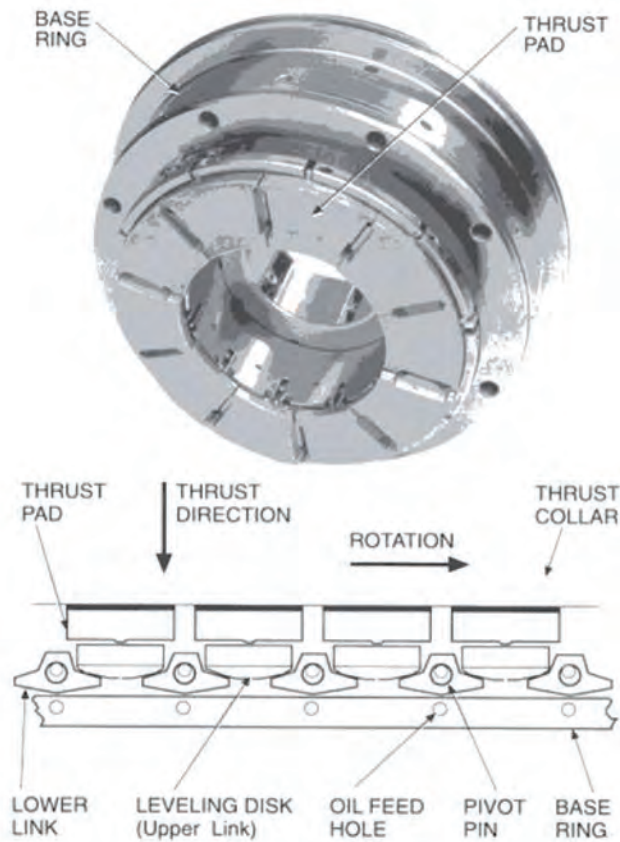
Typical tilting-pad thrust bearing (courtesy of Solar Turbines Incorporated).
